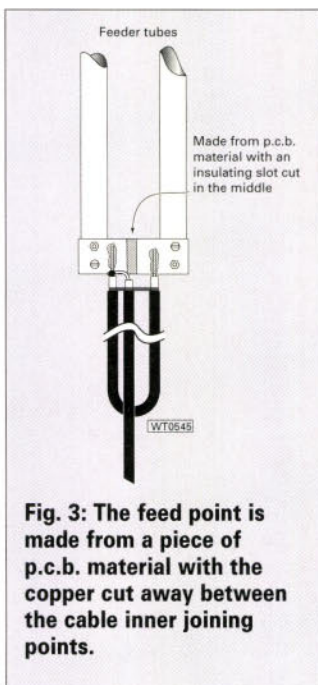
The feed point is made from a piece of p.c.b. material with the copper cut away between the cable inner joining points.
